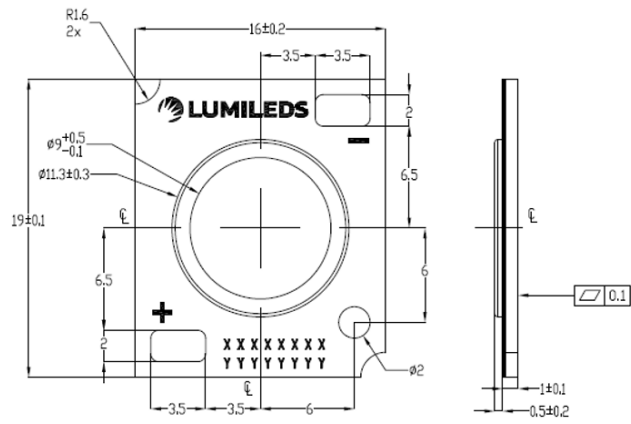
Mechanical dimensions for L2C5-xxxxxL04F0900 (LES 9 mm)
